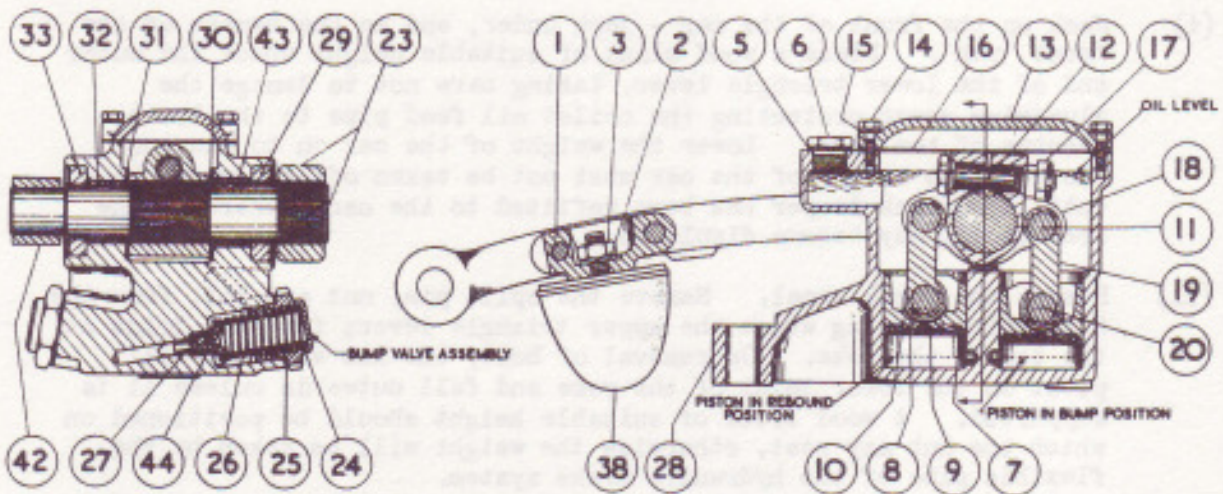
SECTION THROUGH FRONT SHOCK DAMPER.
